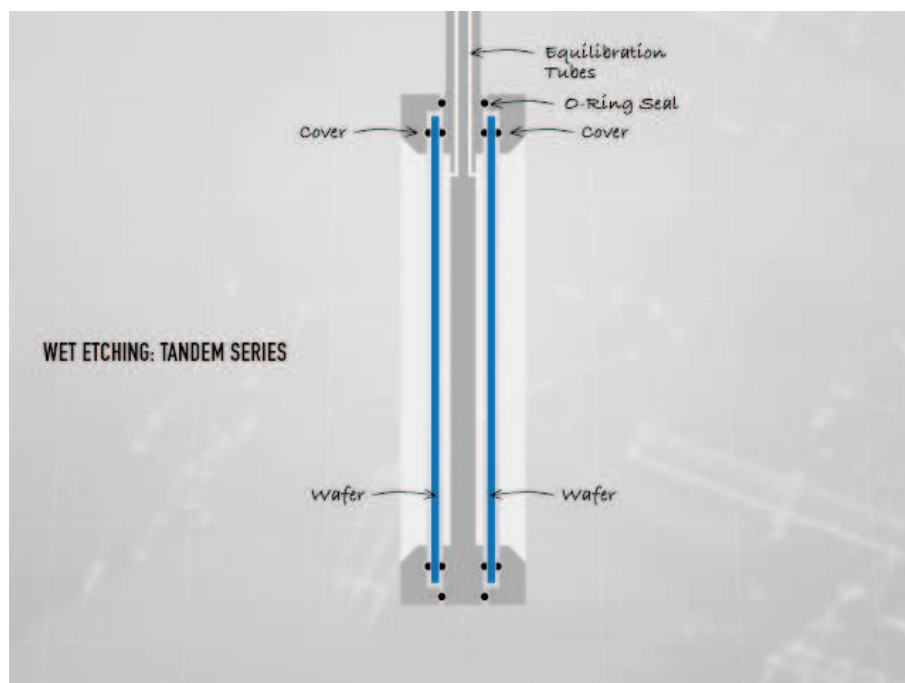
A cross sectional view of the tandem series wet etch holder from Advanced Micromachining Tool (AMMT). The sketch is taken from http://www.ammt.com/content/products/wetetching/wetetching_tandemseries.html.
